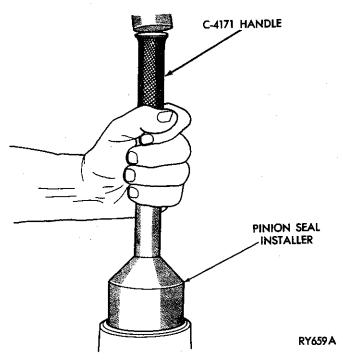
Drive Pinion Gear Shaft Seal Installation
